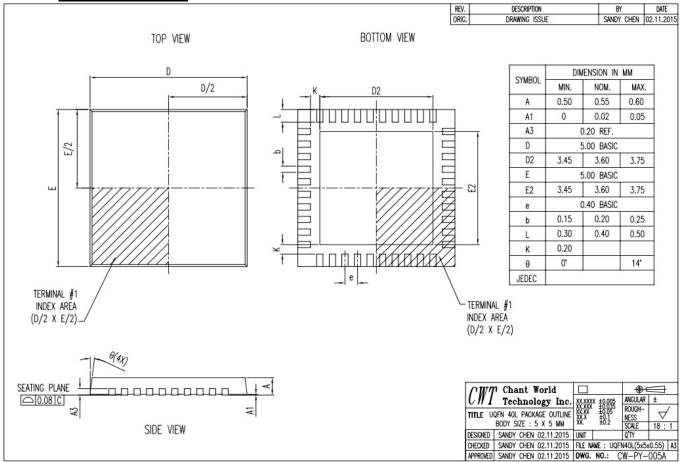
Outline Dimensions of QFN40 Package with Exposed Pad
